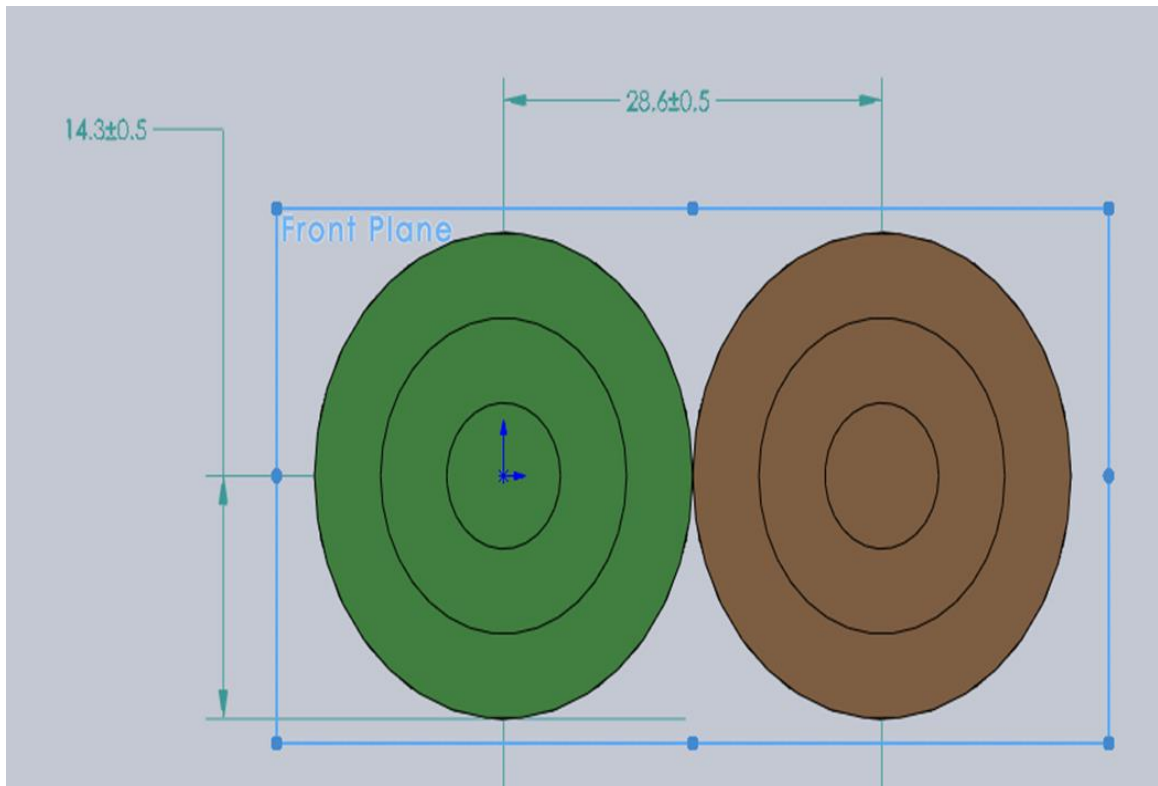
27: front view of hydrogen and oxygen tanks inside the dry section (dimensions in mm)
